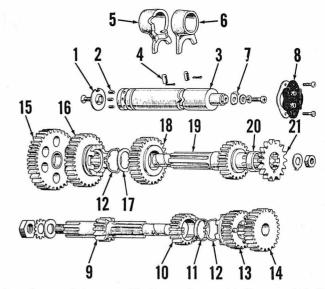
Exploded view of transmission assembly. Top and neutral indicator switch (8) grounds the green light in speedometer housing when in neutral and yellow light when in fourth gear.
